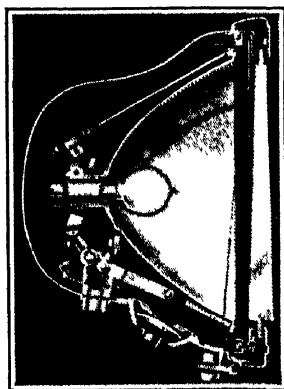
Sectional view of head lamp used on Cadillac Eight—dotted lines show tilted position of reflector which is pivoted.
